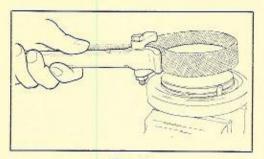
Unscrewing pulley fixed cheek (RM9)
